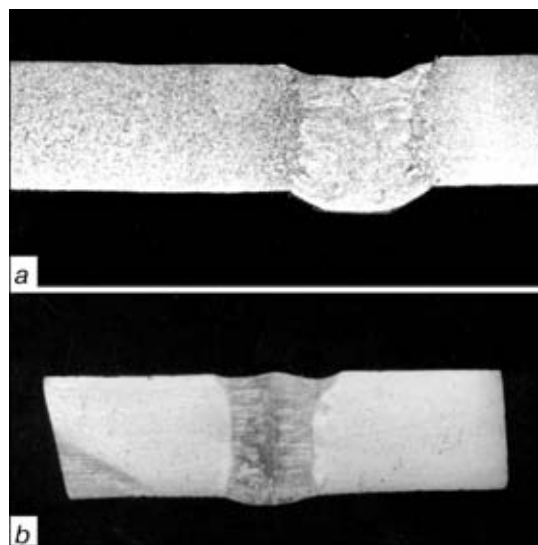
Transverse macrosections of welded joints in low- (a) and high-alloy (b) steel produced by welding in argon using an activating flux
